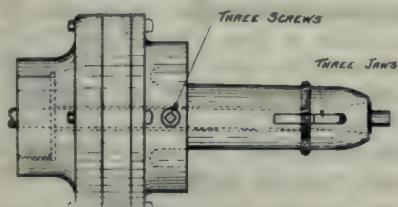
EXPANDING CHUCK FOR HOLDING 18-PDR. SHELL WHILE ROUGH TURNING AND FACING.
